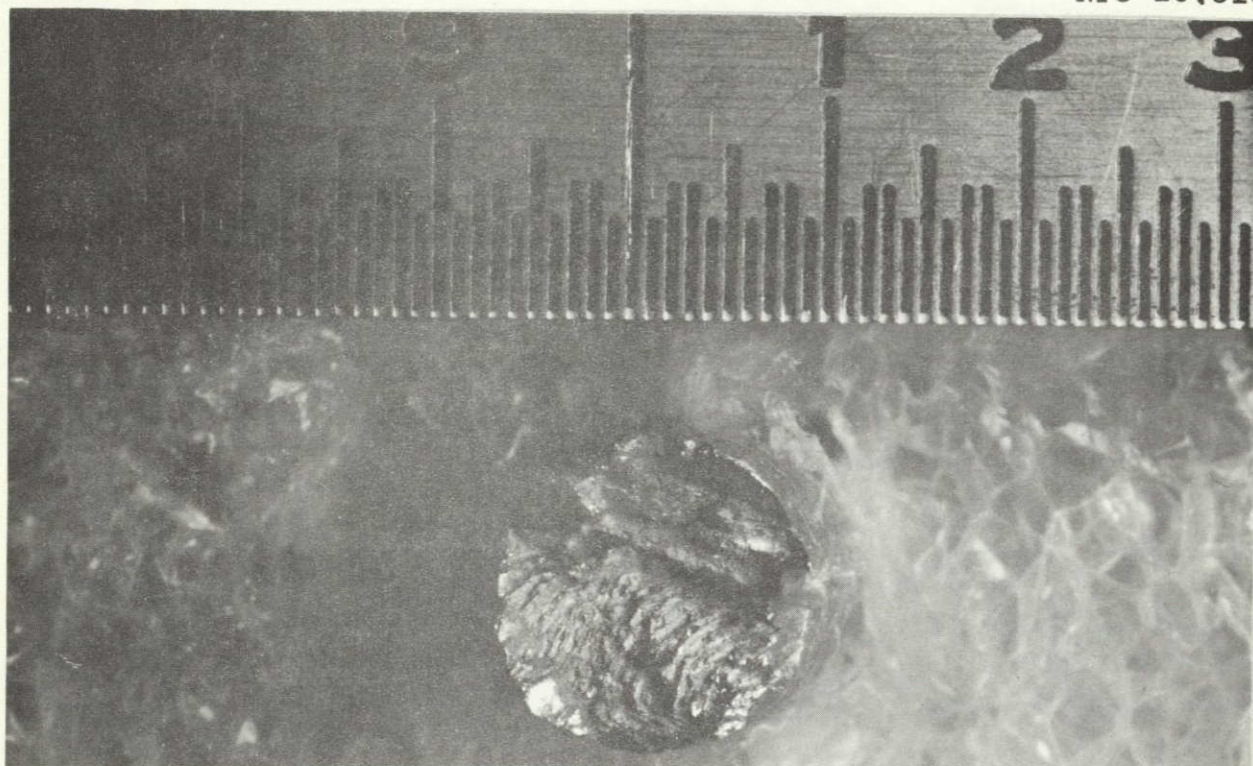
Macrograph (10X) of Aluminum 7039-T64 Welded and Treated to T61, Specimen BW-03: Control
